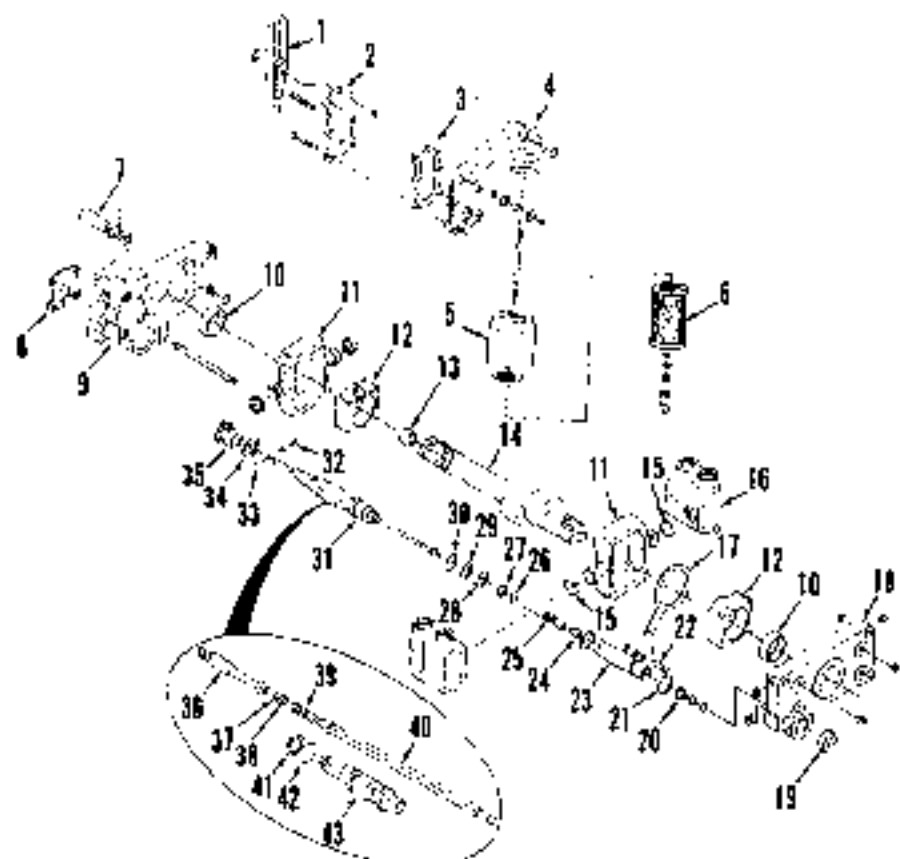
Exploded view of hydraulic (H) pump assembly. Safety relief valve (7) is used on models not equipped with pressure control valve.
